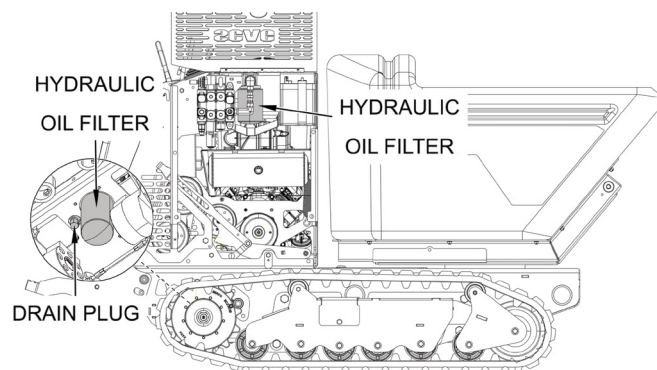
Hydraulic Oil Filters & Drain Plug
